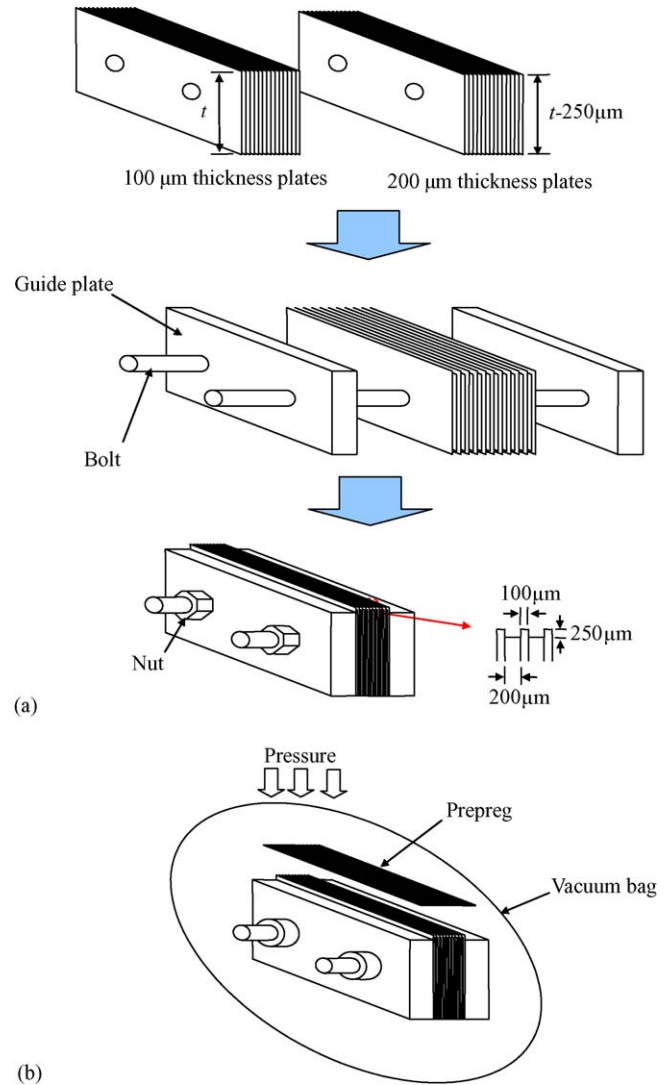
Fabricating process for the grooved mold and specimens with micro-grooves: (a) fabrication method for the mold; (b) molding process for the composites with many micro-grooves.
